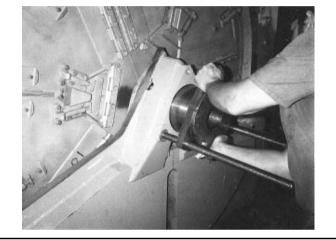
(MSSM0303AE) Pushing the Bearing Housing into the Shell (60" Rapid-load machine shown)
